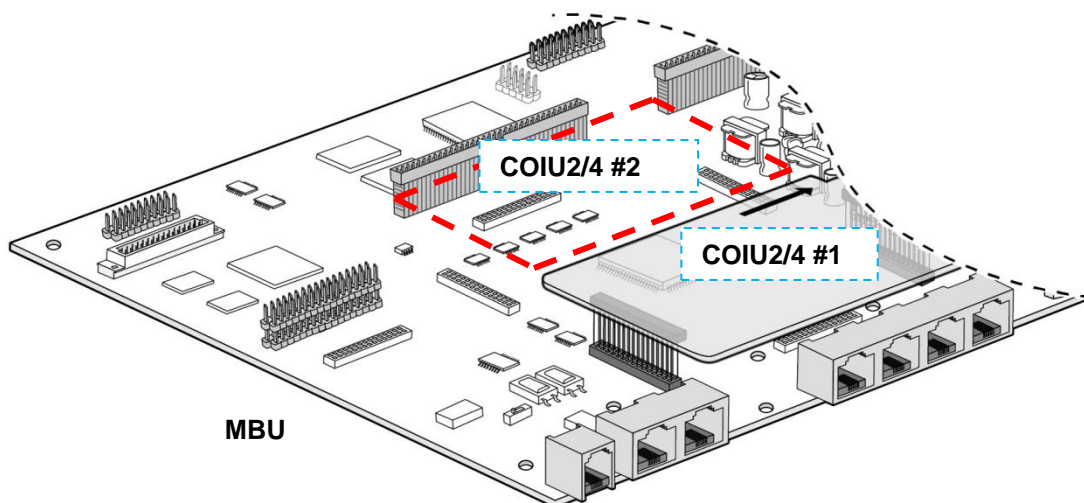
COIU2/4 on MBU Board Installation
